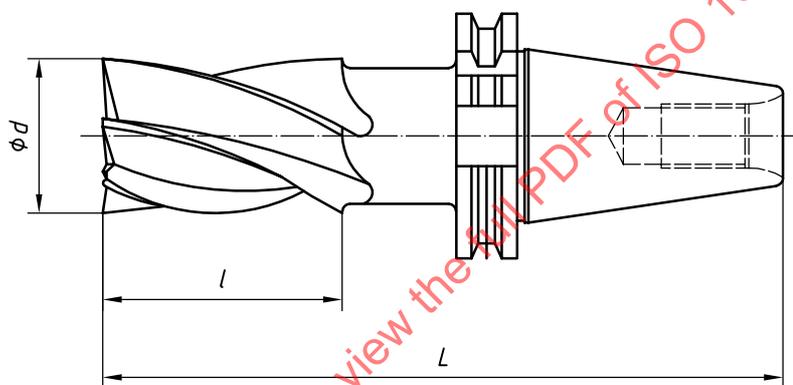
Milling cutters with 7/24 taper shanks for automatic changers
